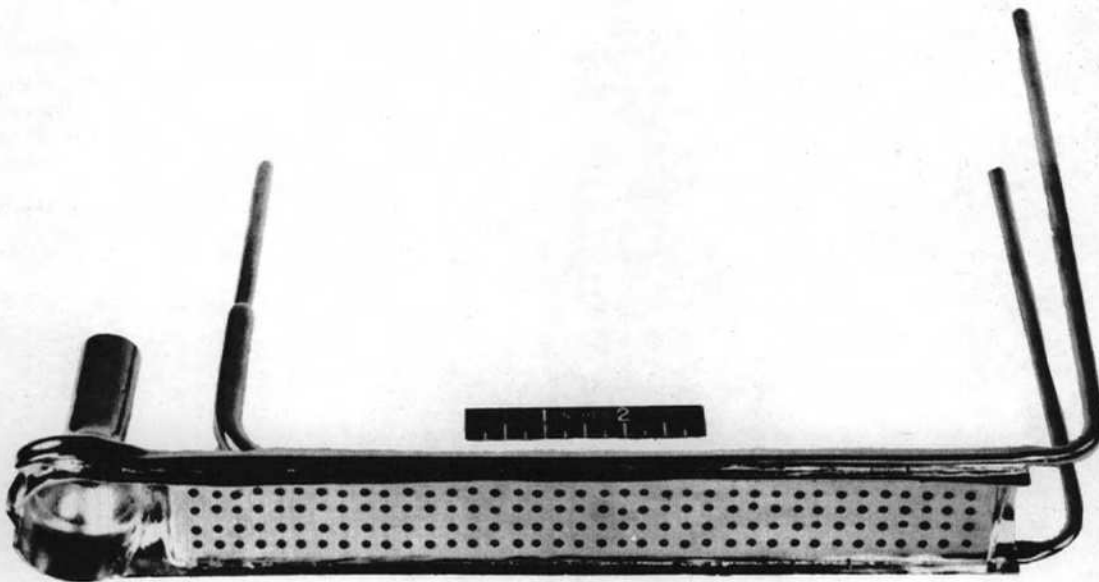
Trailer Shield Used in Inert-Gas Shielded, Metal-Arc Welding of Columbium Plate. [REDACTED]
